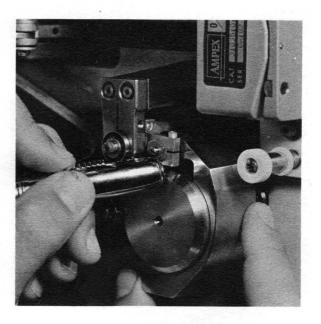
Figure 5-9b. Adjusting Capstan Roller Parallelism and Gap
